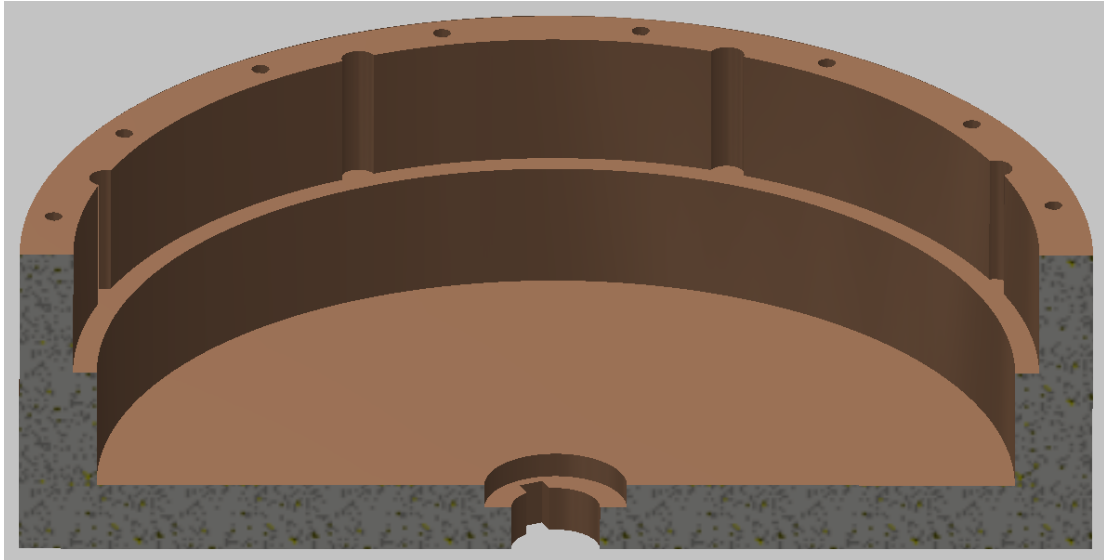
Aluminium rotor drum. Machine dimensions as described in Appendix B.
